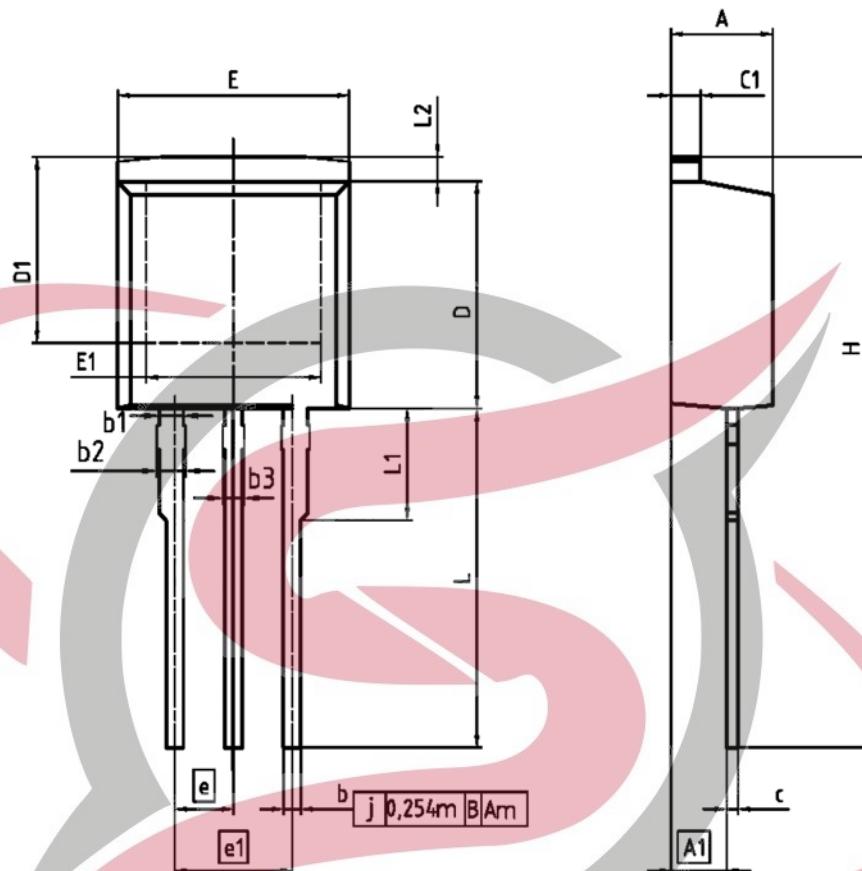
Outline PG-TO-220 FullPAK dimensions in mm
